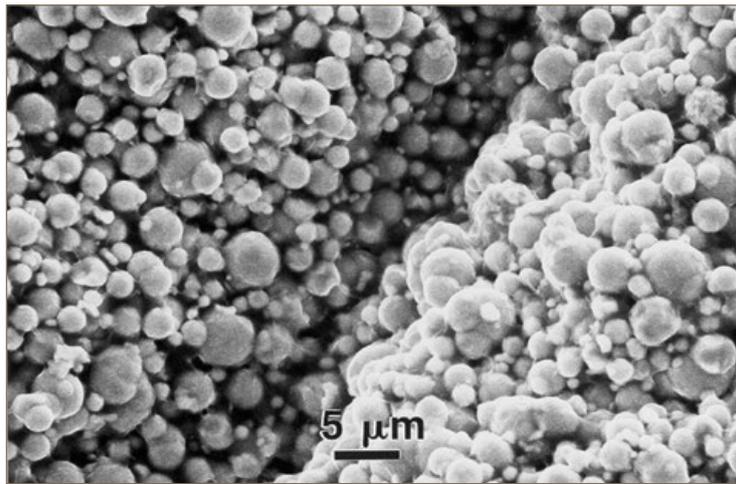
Environmental scanning electron microscope image of a weld line that has not properly bonded. The sintered component showed cracks in these same locations, indicating that sintering opened this small defect
